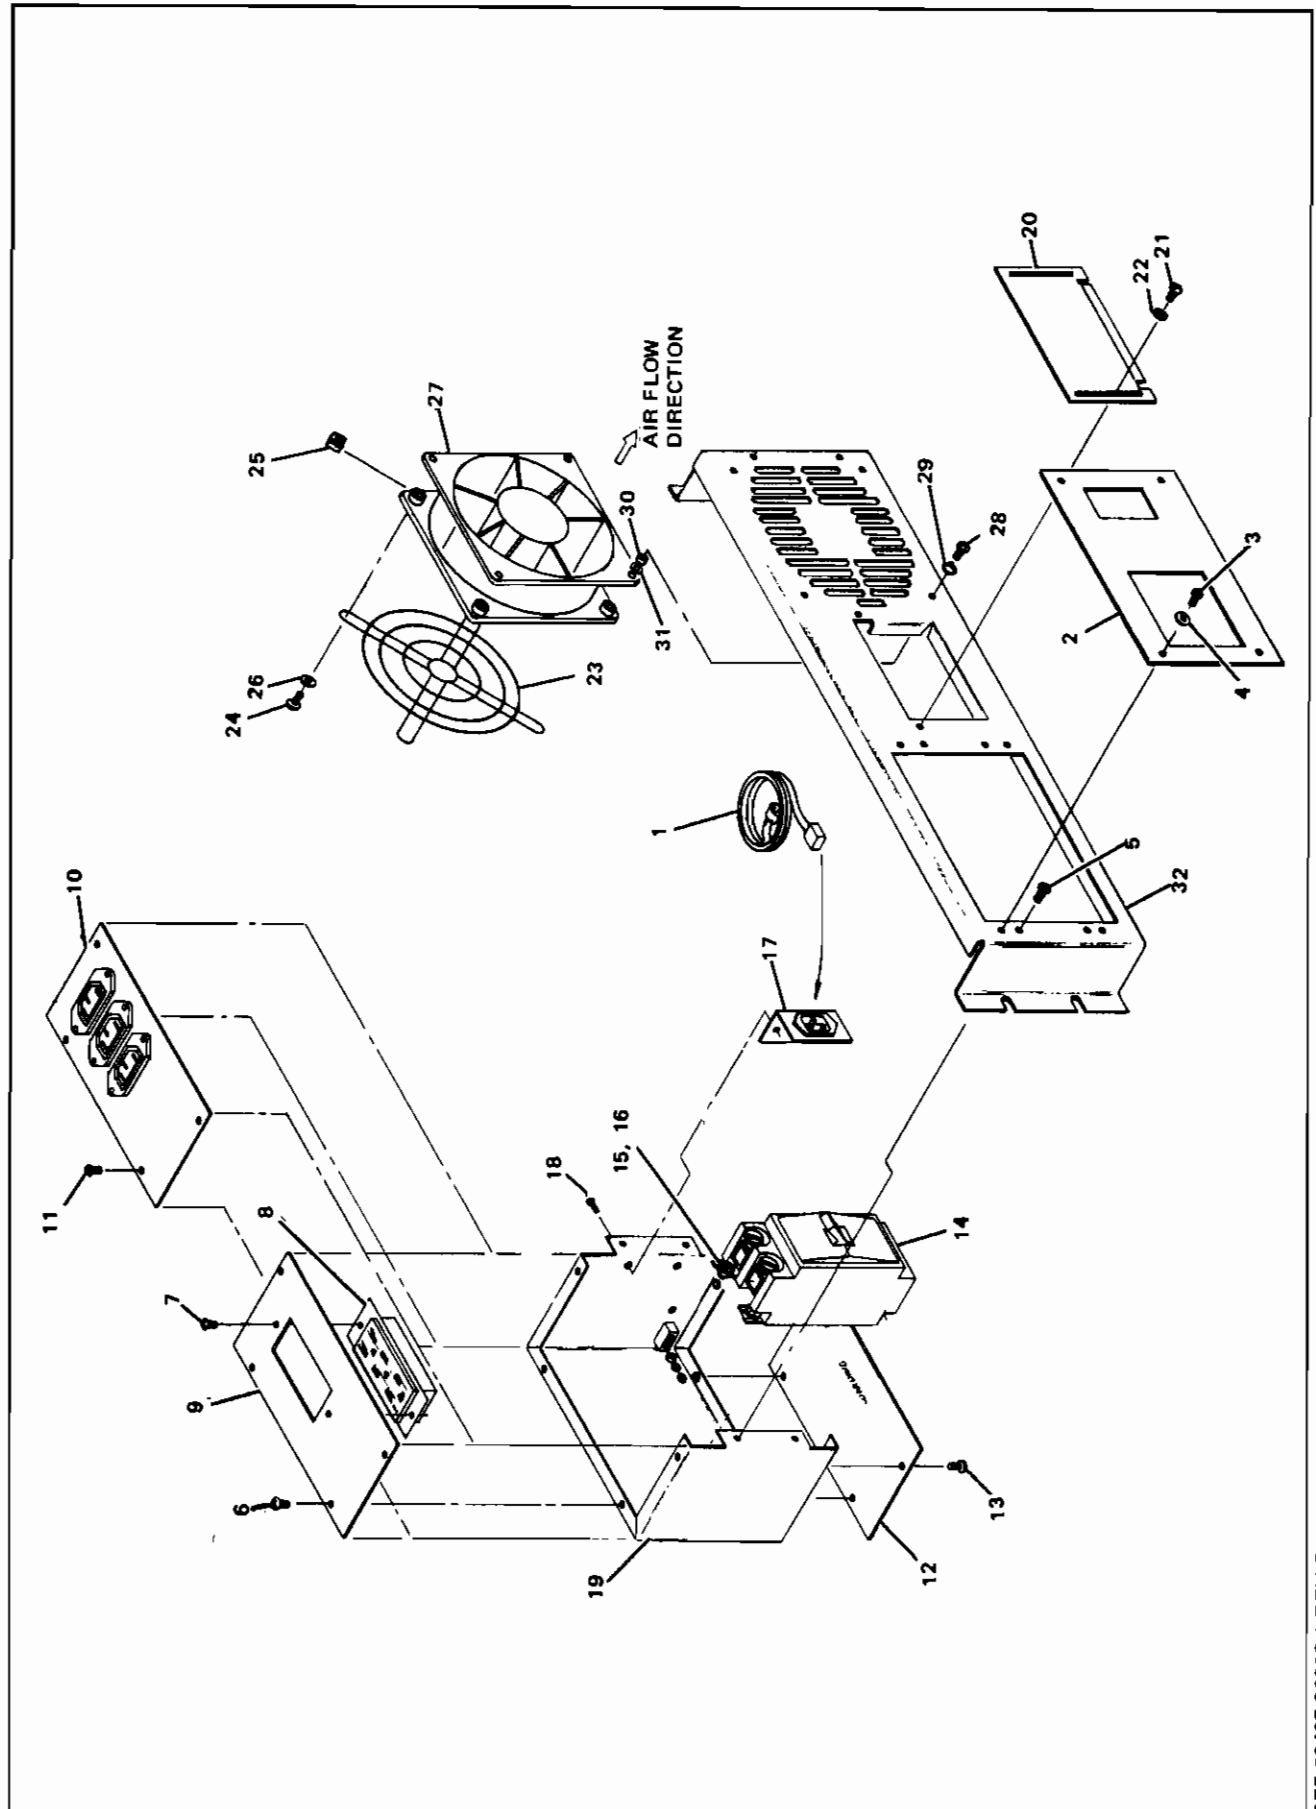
Power Panel Assembly (Part no. 29425-60003 and 29425-60004), Exploded View
